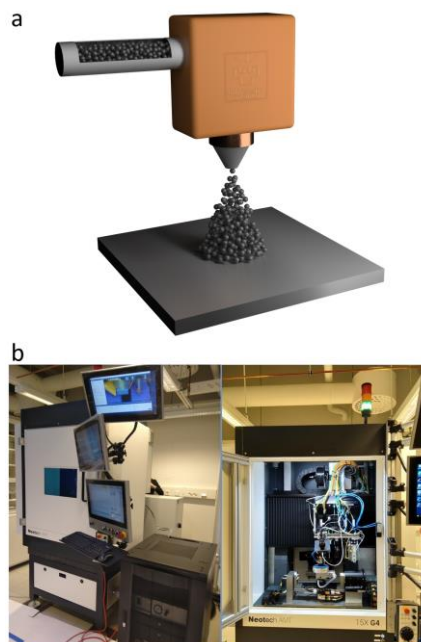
Spray printing technique. a) 3D representation of spray printer nozzle during the printing process. b) Neotech AMT 15X G4 printer used in this research for spray printing NMC 88 cathode layers.
